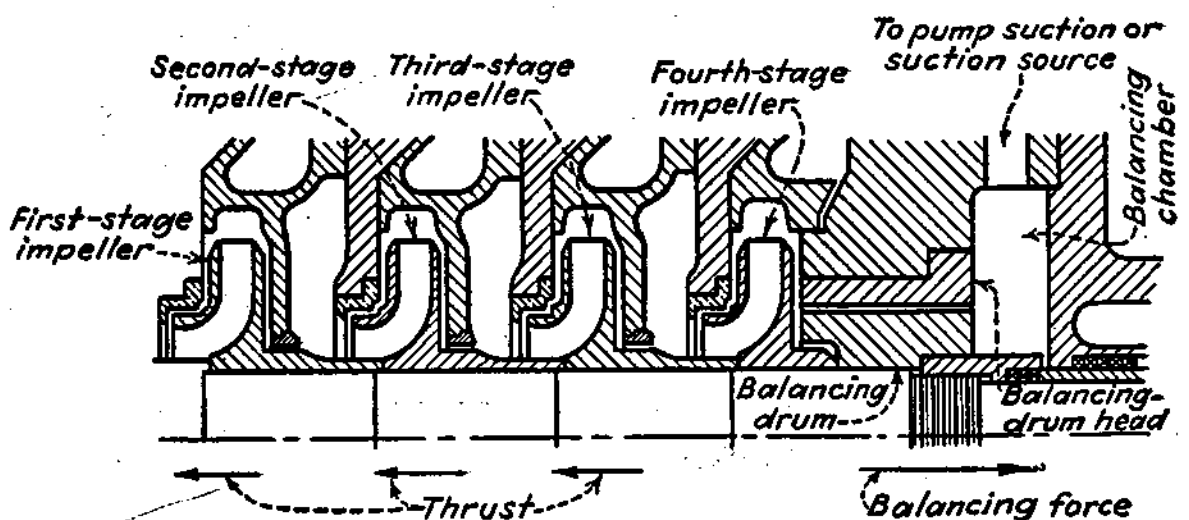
Partial section of multistage pump with balancing drum to compensate for axial thrust resulting from unbalanced impellers.
